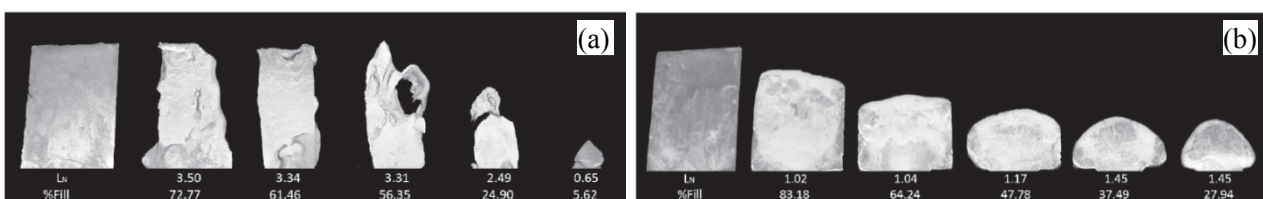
Flow behavior of an aluminum melt into a die casting in (a) liquid casting and (b) slurry casting [4].
